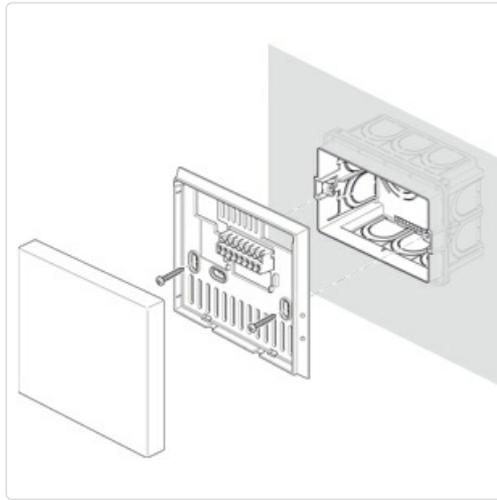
A diagram demonstrating how to install the Vimar Wi-Fi Thermostat into a standard electrical wall box, securing it with screws.
